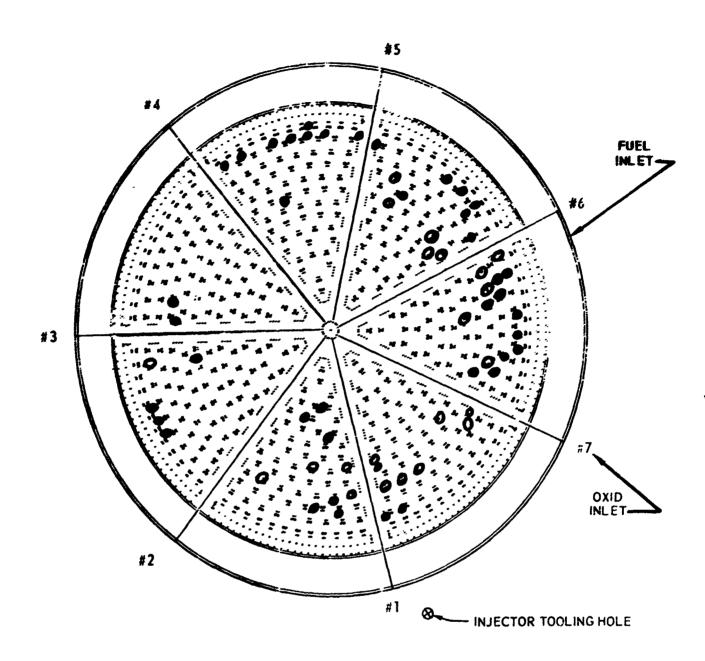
Location of Base Weld Cracks, Injector S/N 697 (1 of 2)
